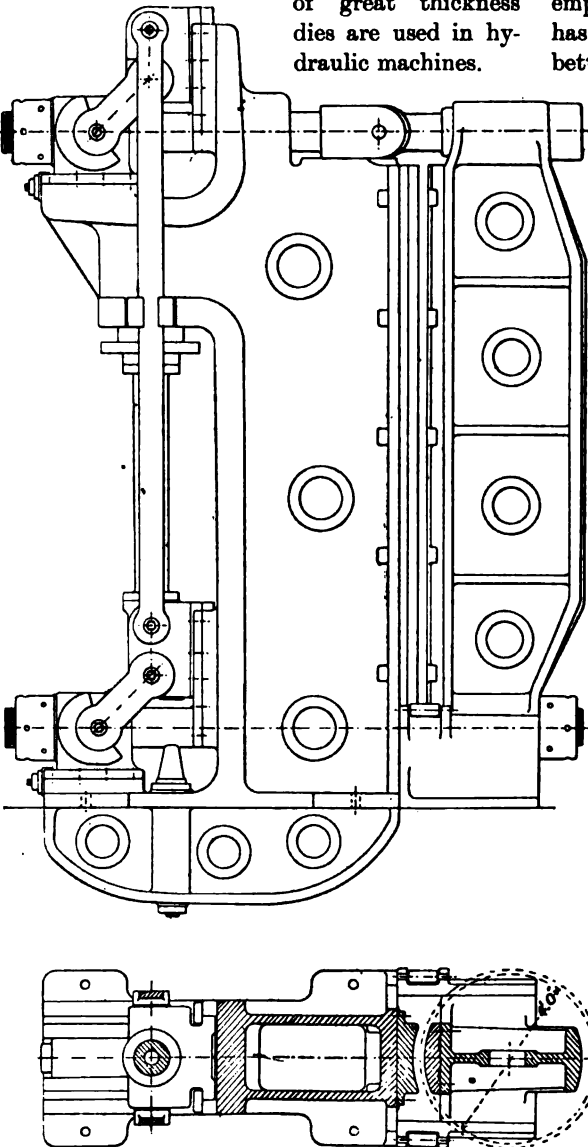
Hydraulic Plate Bending Press. (Henry Berry & Co., Ltd.)
